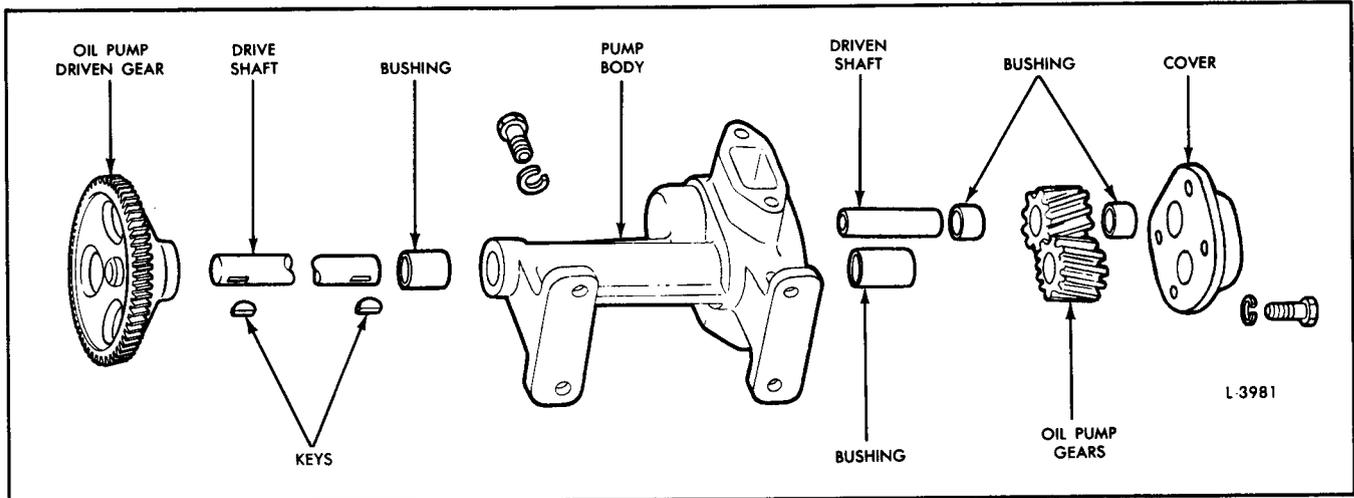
Lubricating Oil Pump Details and Relative Location of Parts (8V Engine)
